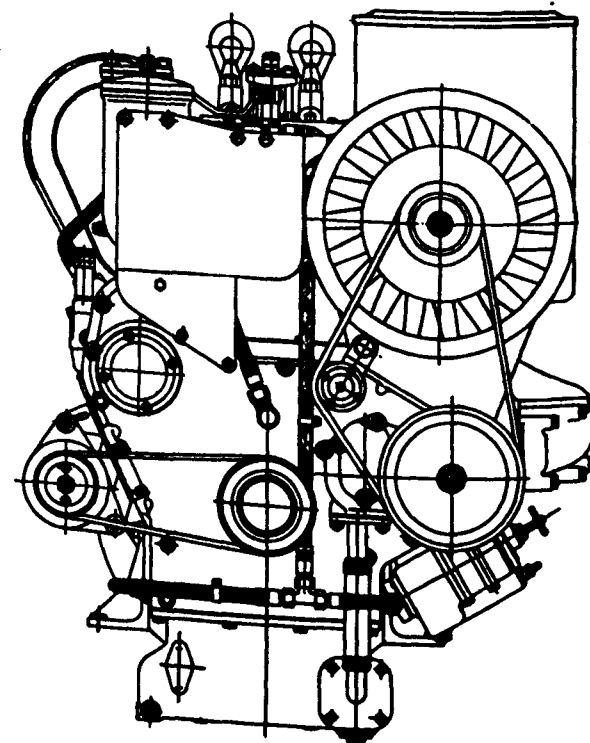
A front view of a SKODA 4 D 110A air-cooled, four-cylinder engine.
